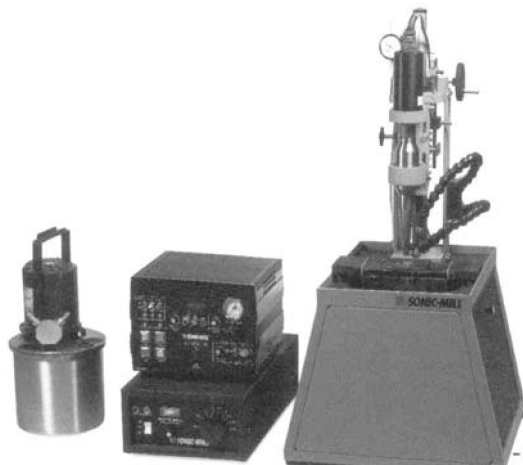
Compact 500W USM machine for small, light- weight work piece [58].
